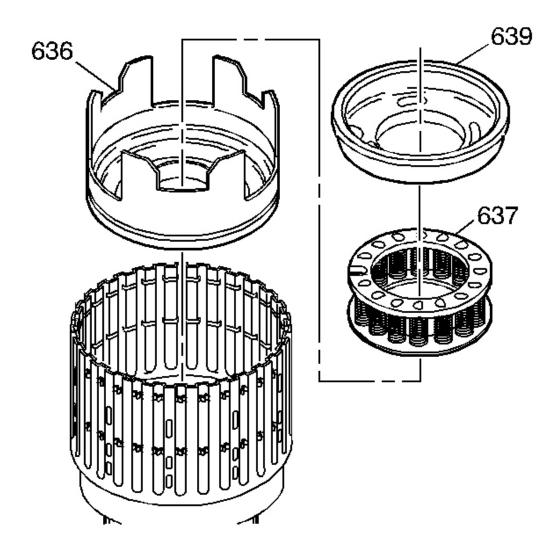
View Of Input Clutch Piston Assembly Courtesy of GENERAL MOTORS CORP.
